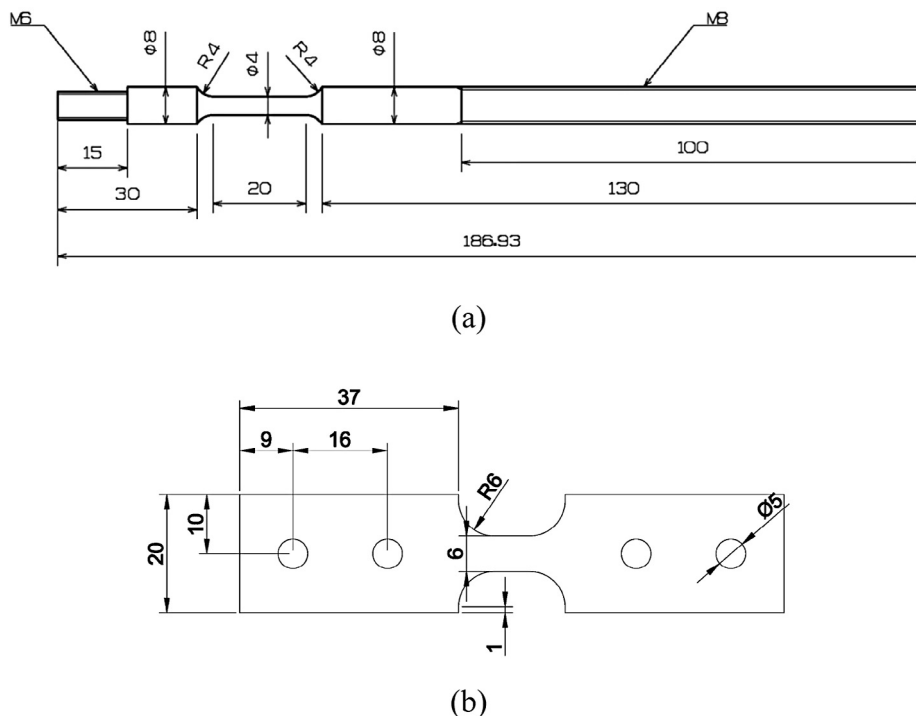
Dimension of specimens for: (a) uniaxial tensile tests; and (b) tension SHPB tests.
